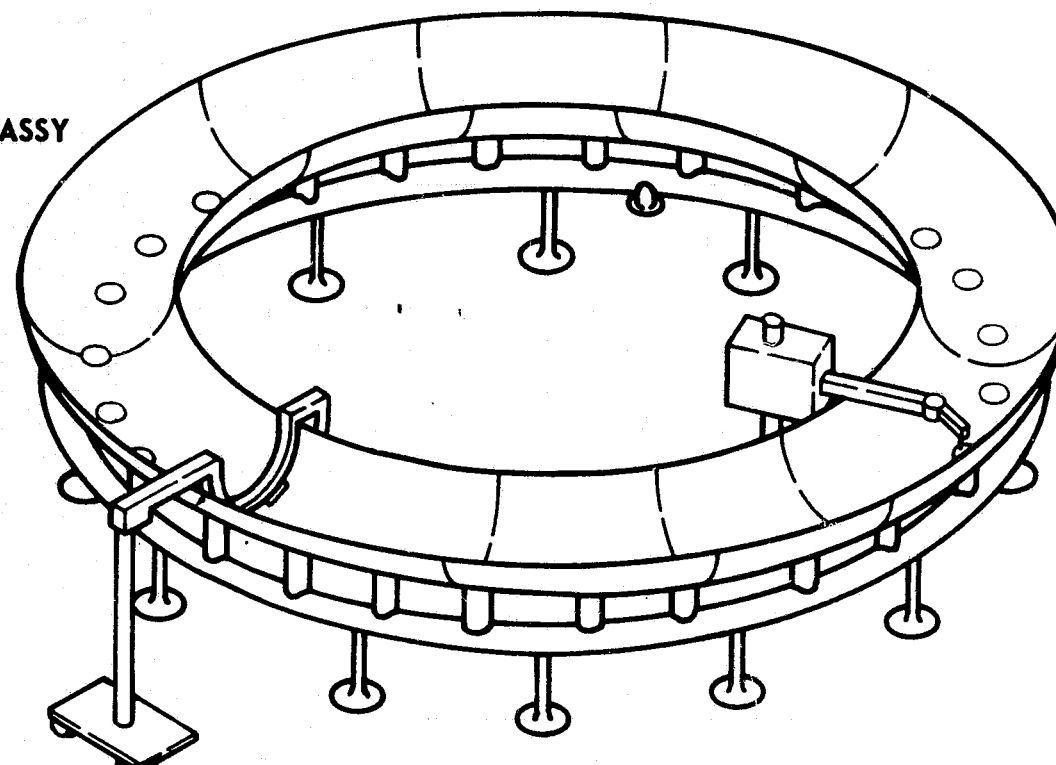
LH₂ TANK ASSEMBLY FIXTURE
